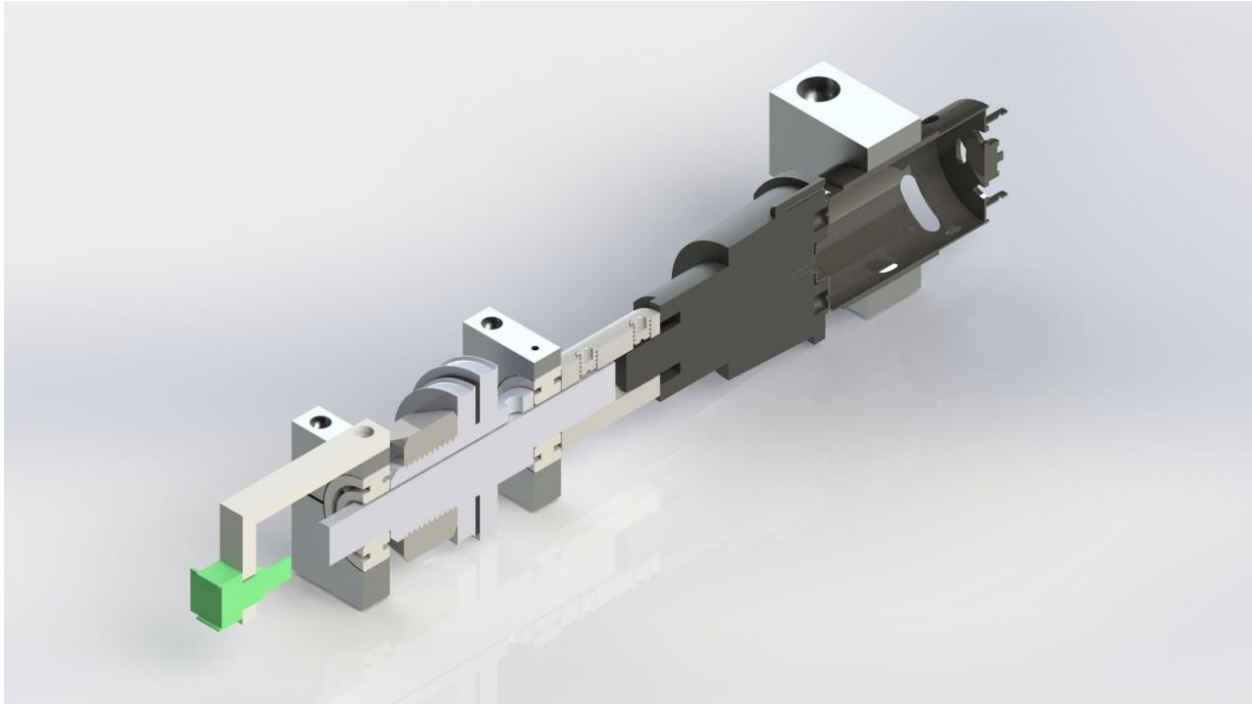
Elbow Motor Housing Revision 2 (Section View)
